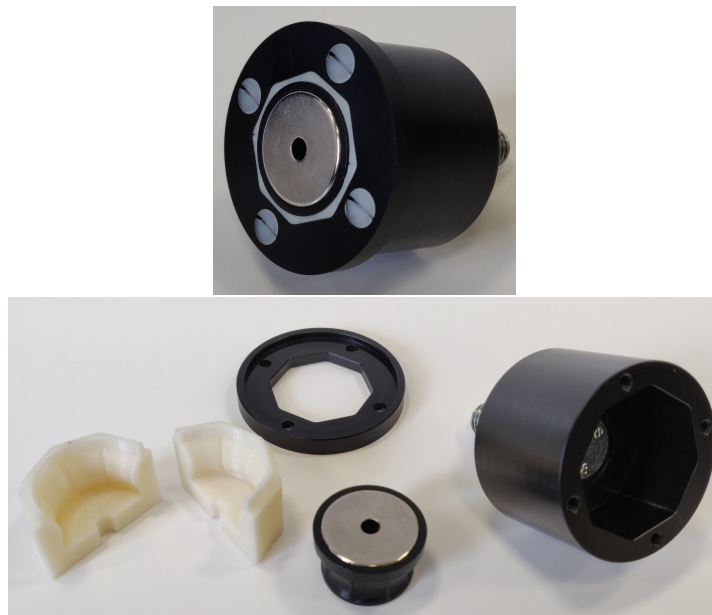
Custom magnet vice used to hold spring polymagnet demonstration during tensile testing.
